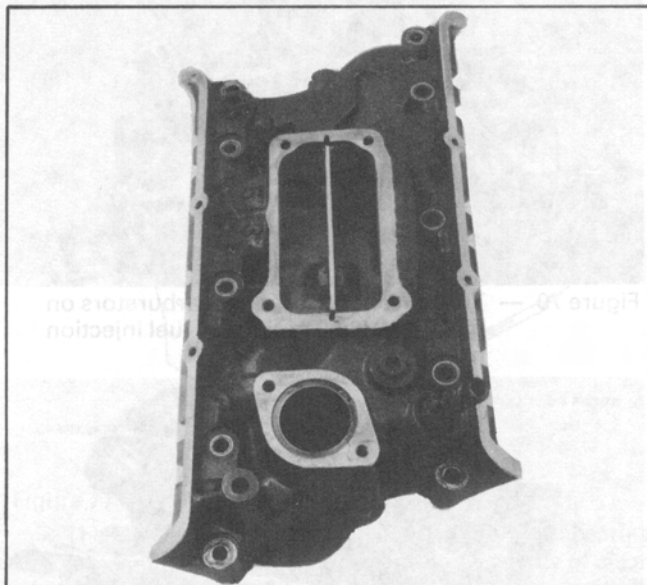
Fabricated plenum divider for four-barrel carburetor conversion.
